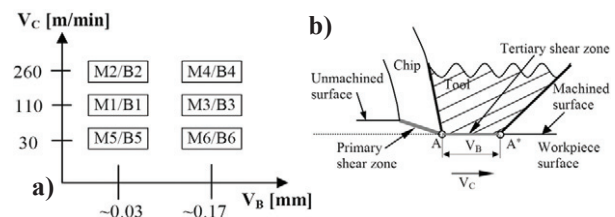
a) Cutting speeds and flank wear used during hard turning tests. b) Schematic illustration of the interaction length A-A\* between the workpiece surface and the tool flank wear.
